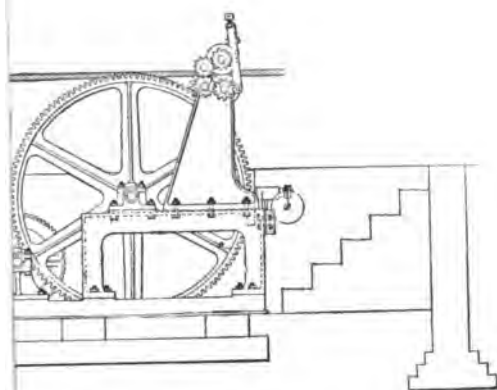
12-BOBBIN STRANDING MACHINE.
